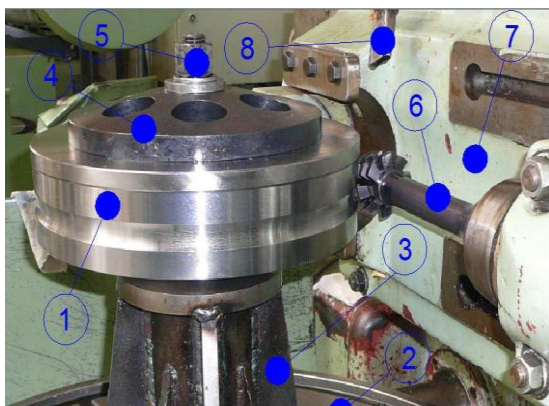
Clamping the workpiece in a special fixture (1 – turned semi-finished product; 2 – machine rotary table; 3 – clamping stand; 4 – clamping flange; 5 – clamping nut; 6 – tool - hobbing cutter; 7 – tangential support; 8 – cooling equipment)
